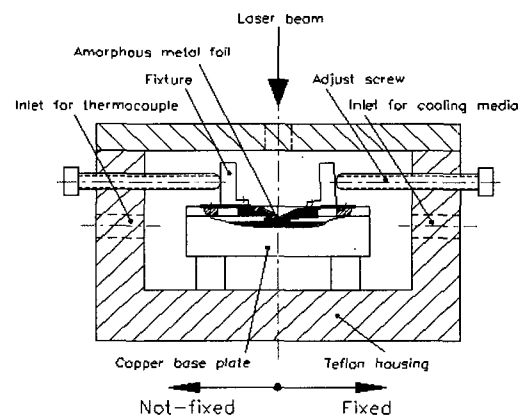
The fixture for laser welding of amorphous metal
